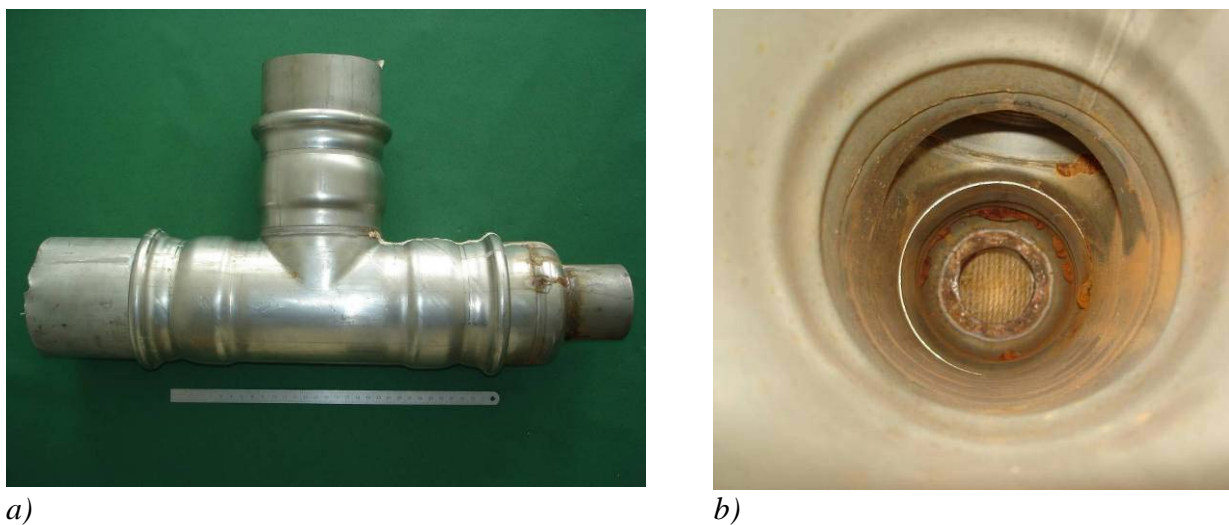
a) Press fitting for large dimension pipes perforated after less than 1 year service with lukewarm drinking water. b) Inside of fitting showing red brown tubercles at welds.
